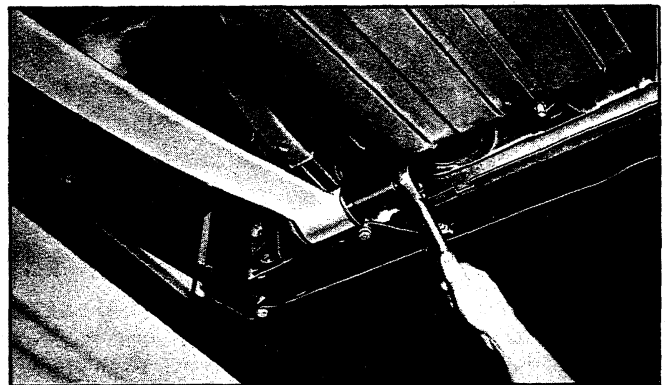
Disassembling Rear Spring Shackle (Chevy II)
